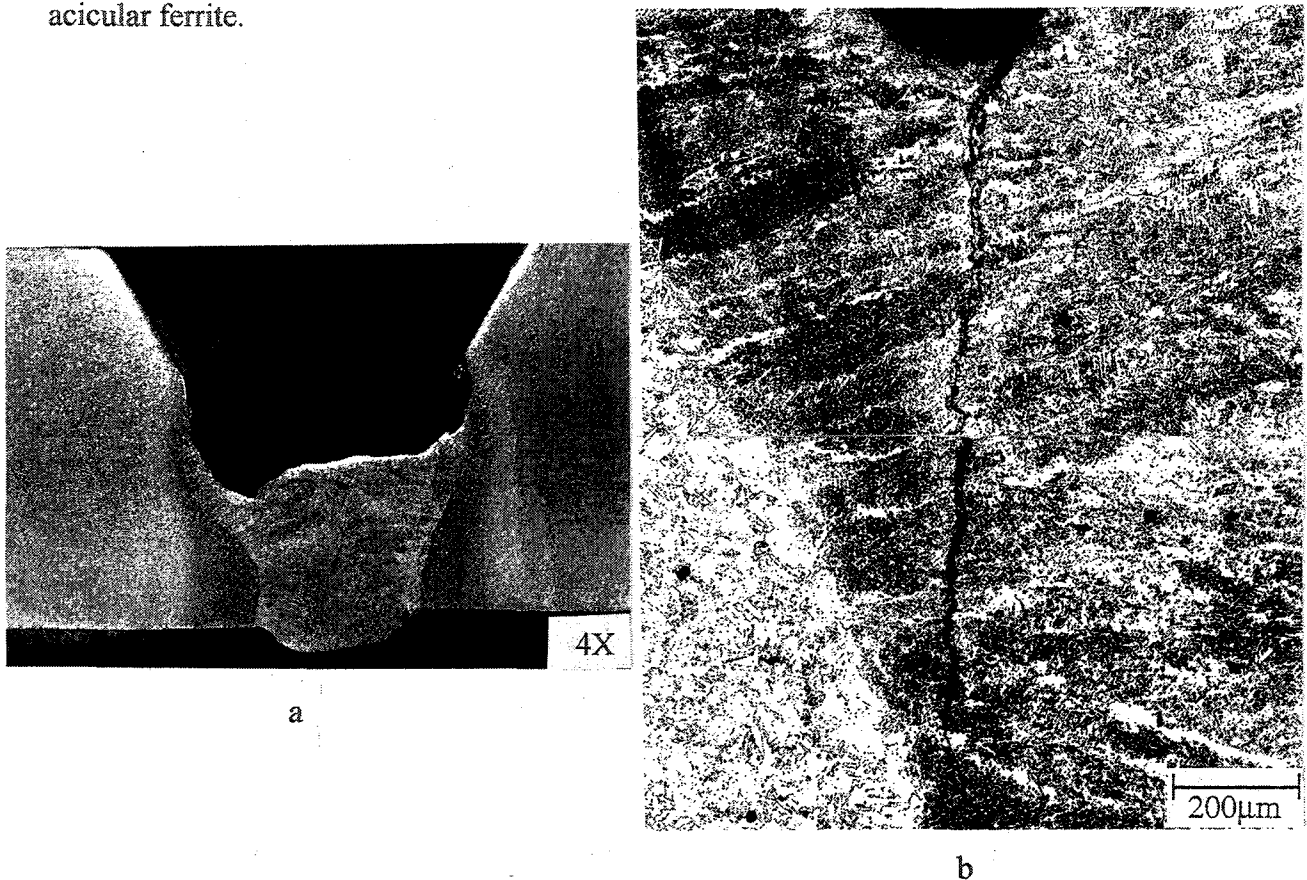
(a) Macrophotograph and (b) Enlarged view of the section of weld using E 6010 electrode A_1 .
